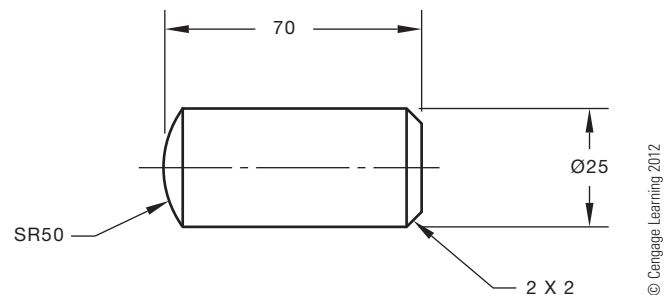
One-view drawing with the diameter specified in a dimension.
